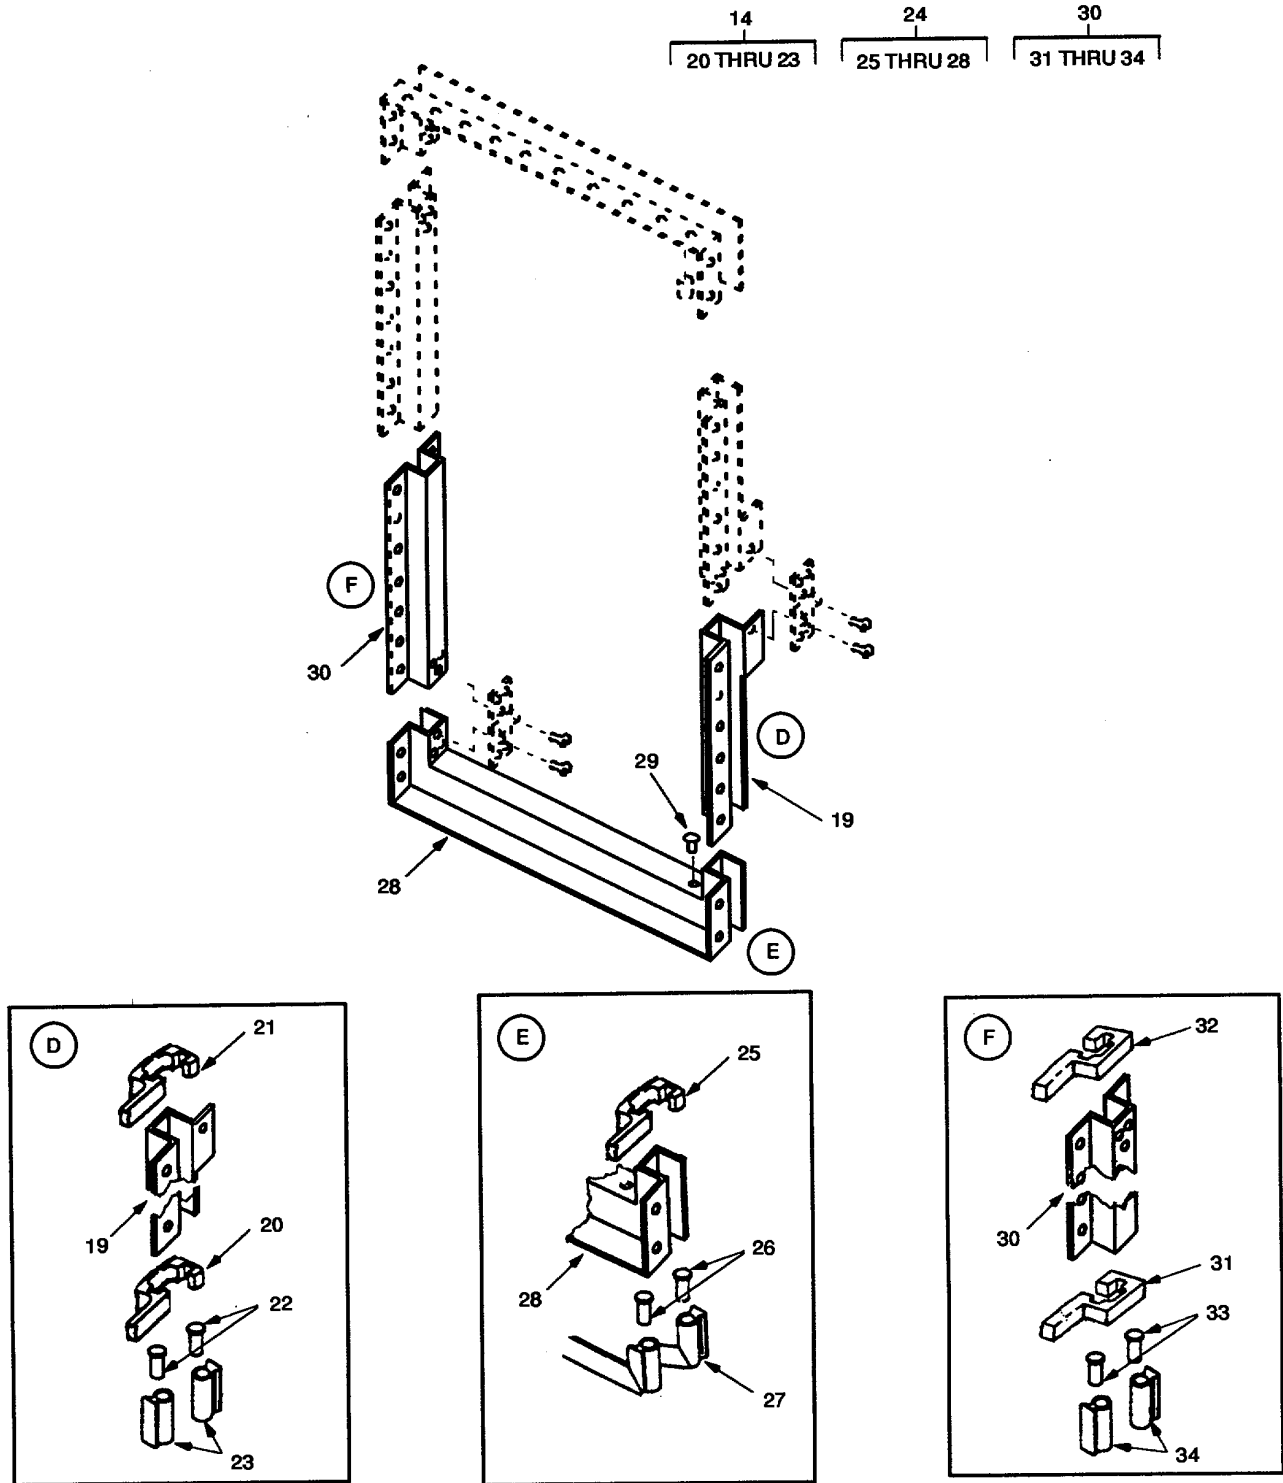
FRAME ASSEMBLY (ISO) (SHEET 2 OF 3).
